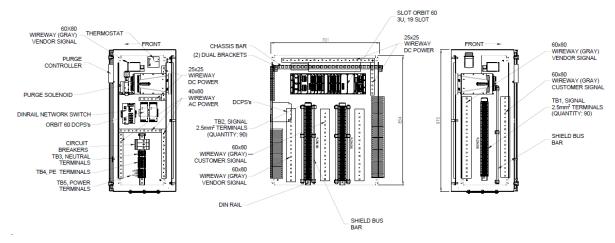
Orbit 60 in NEMA 12 wall-mount cabinet (800 mmW x 900 mmH x 400 mmD)
